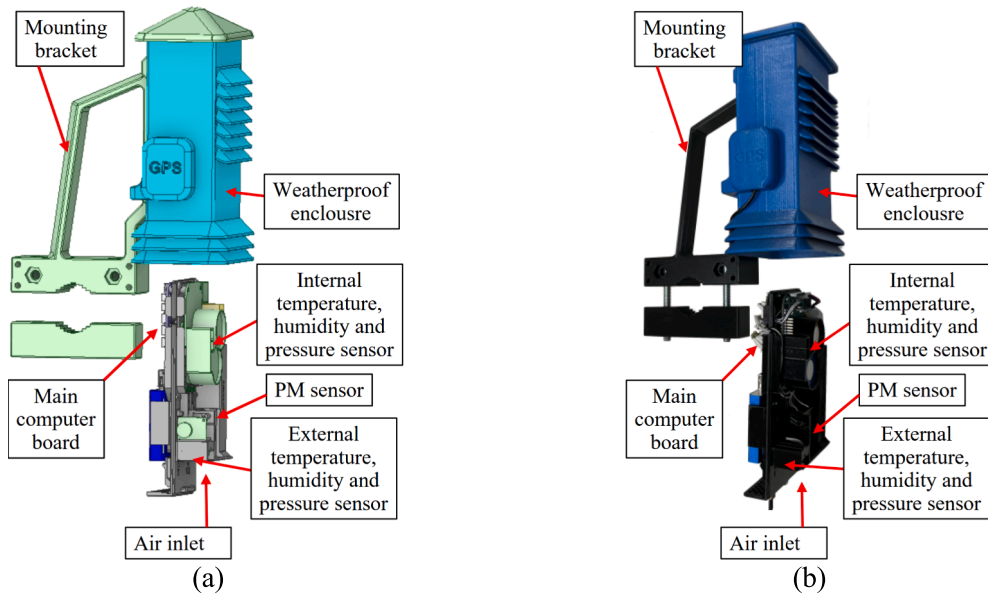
Assembled system with weatherproof enclosure: (a) - project, (b) - real picture.
